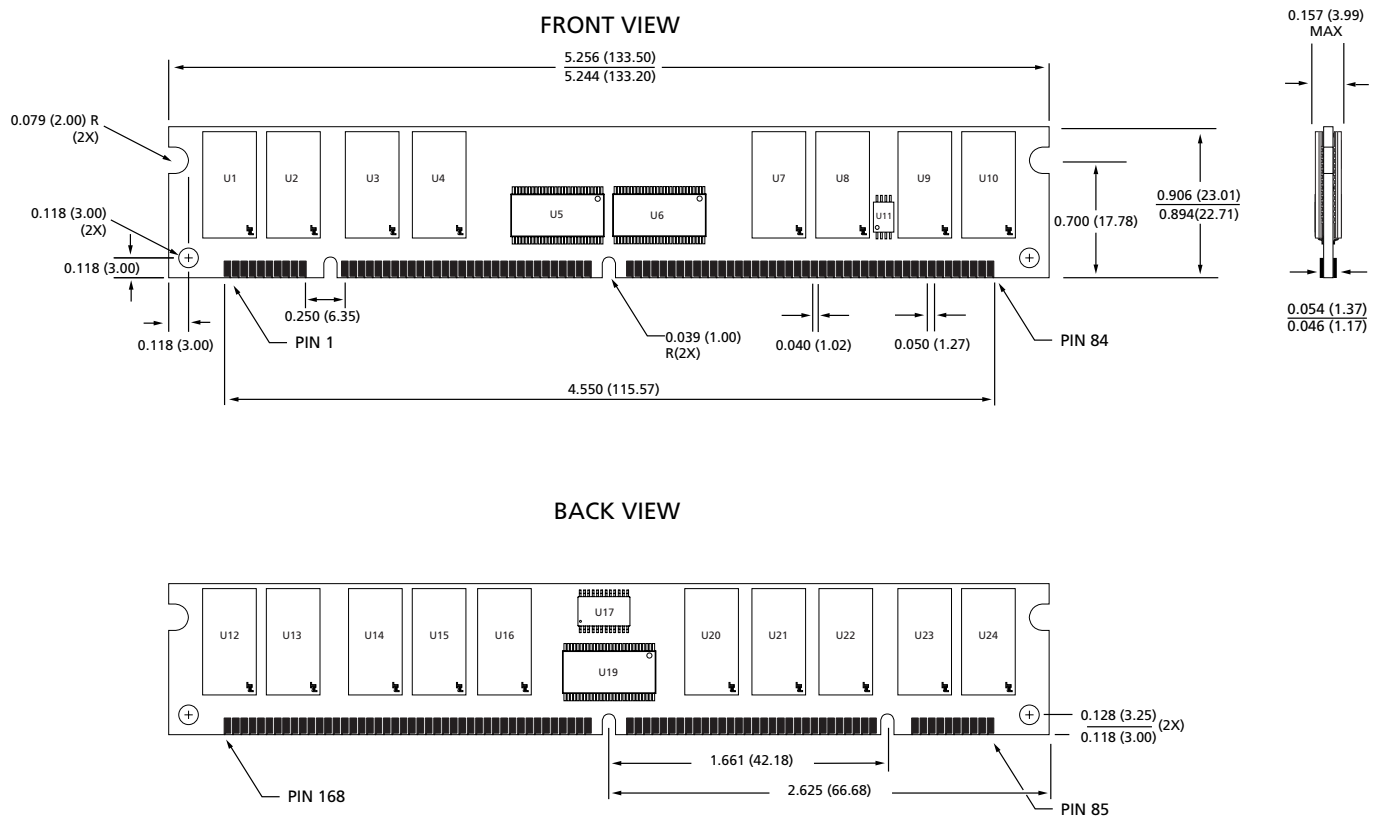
168-Pin DIMM Dimensions – Standard PCB
